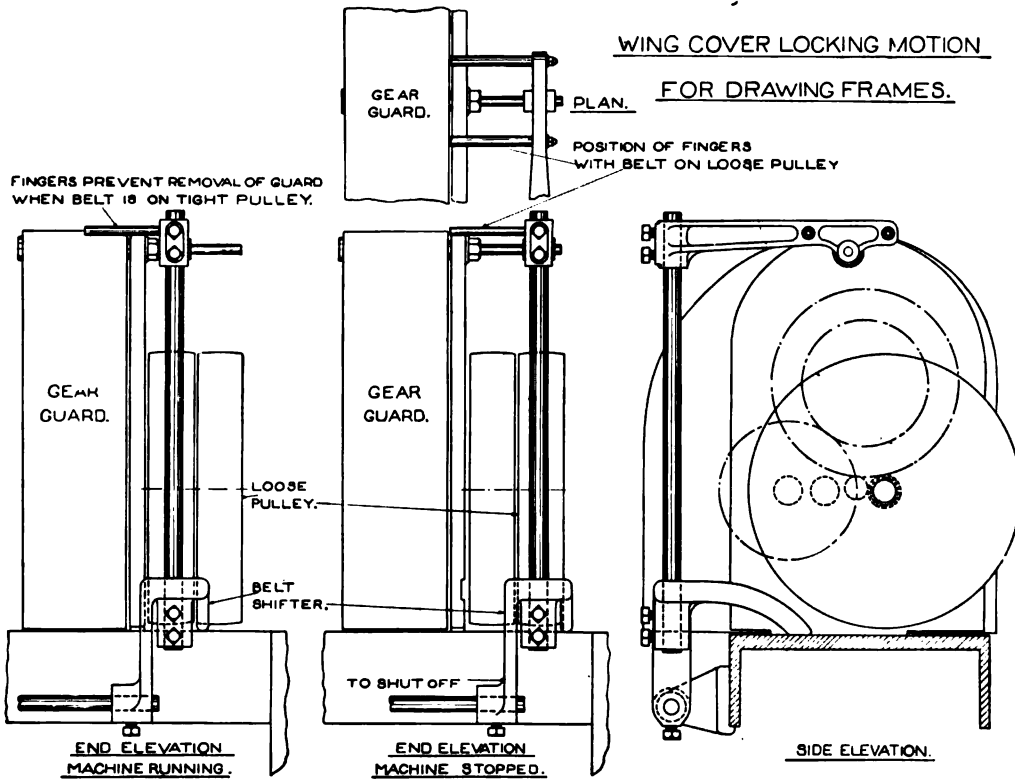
Arrangement to Prevent Removal of Drawing Frame Gear Cover while the Machine is running.
